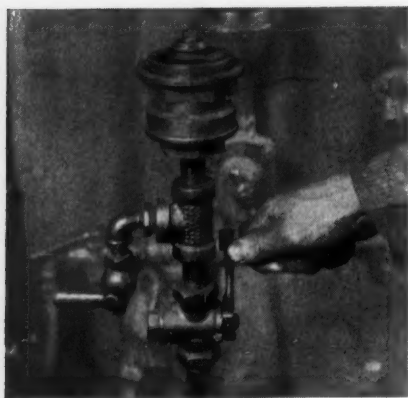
Device for lapping-in new rings in pump governor steam bodies.
